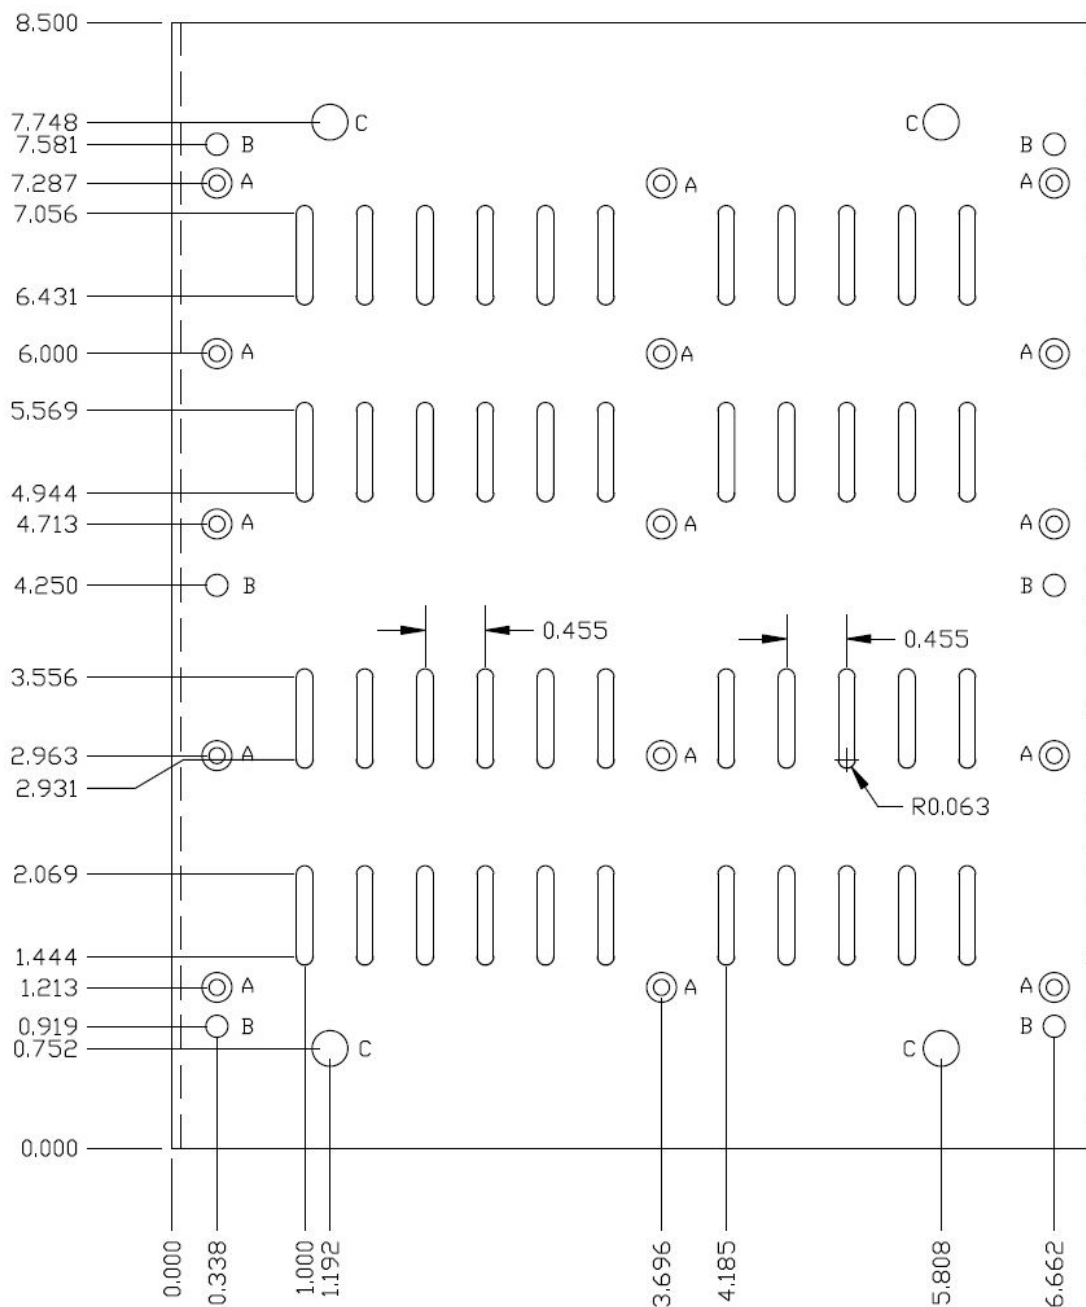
Dimensions of P470 Enclosure, Bottom view.
